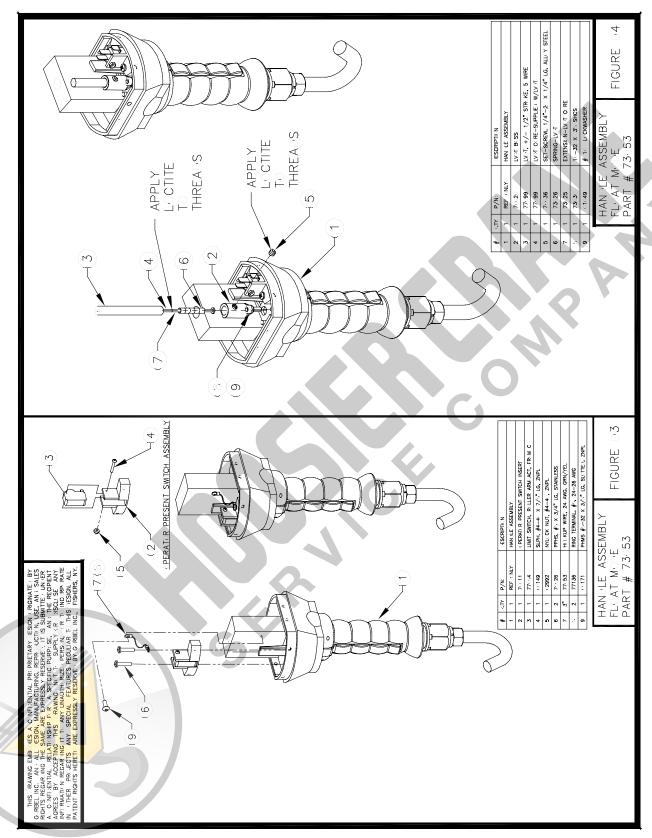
(bottom) & Figure D4 (top). Float Mode Handle Assembly.
